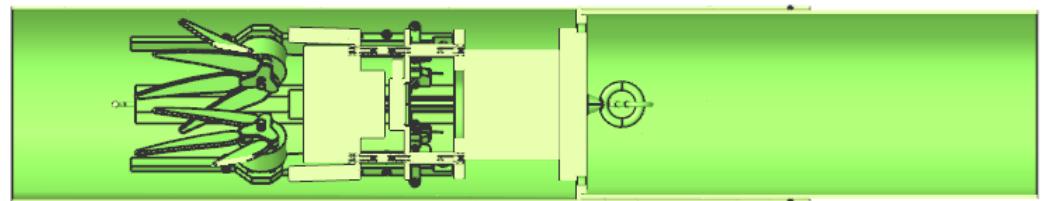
Payload Section Assembly Cross-Sectional Views
